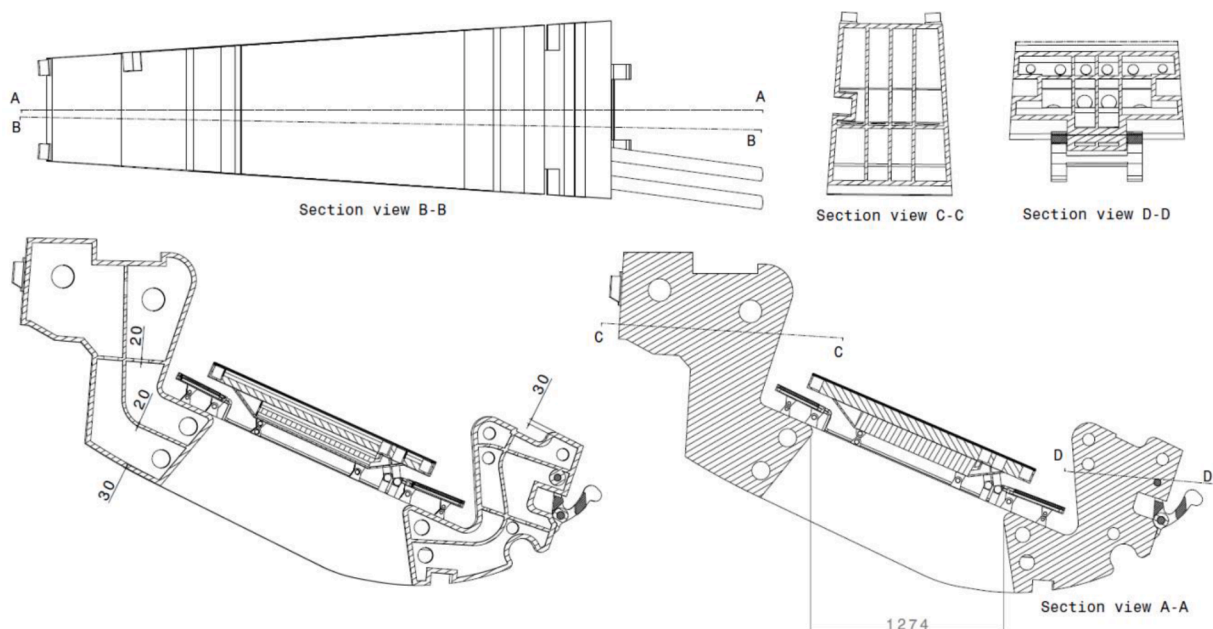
Technical drawings showing the cut views of a cassette body with shielding liner and reflectors.
